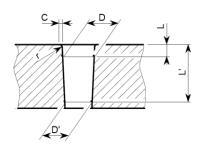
Hole Geometry (Geometry Code P4) and dimensional requirements for installation of Protruding tapered shank bolt
